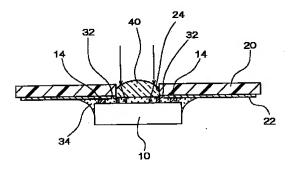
Drawing 6 is drawing showing the electronic equipment which has optical equipment which applied this invention.
